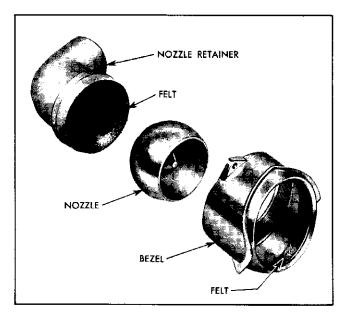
Bezel and Nozzle Assembly-Exploded View
